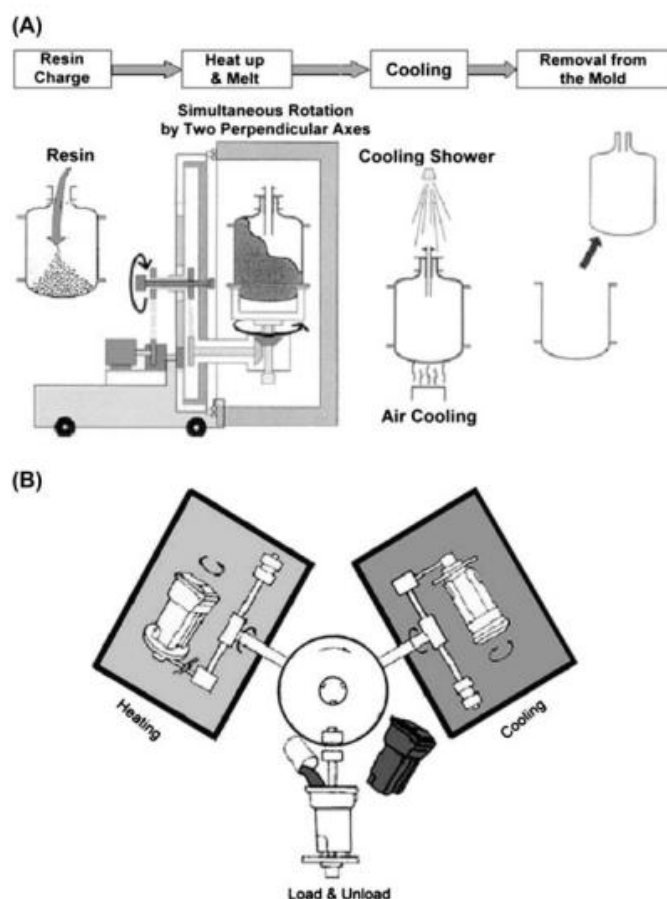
Schematic diagram of rotational molding (Ebnesajjad & Khaladkar 2017)
